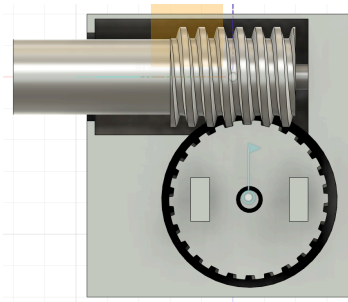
shows a CAD sketch on the intended vision for the final prototype. This sketch can be flipped for right hand usage.
